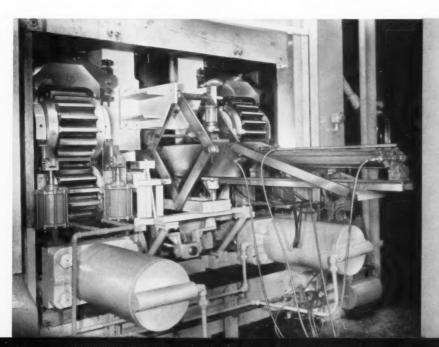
Rear view of press seen in heading illustration and Fig. 4 shows the two large hydraulic cylinders for reciprocating the racks used to rotate the die rolls.
